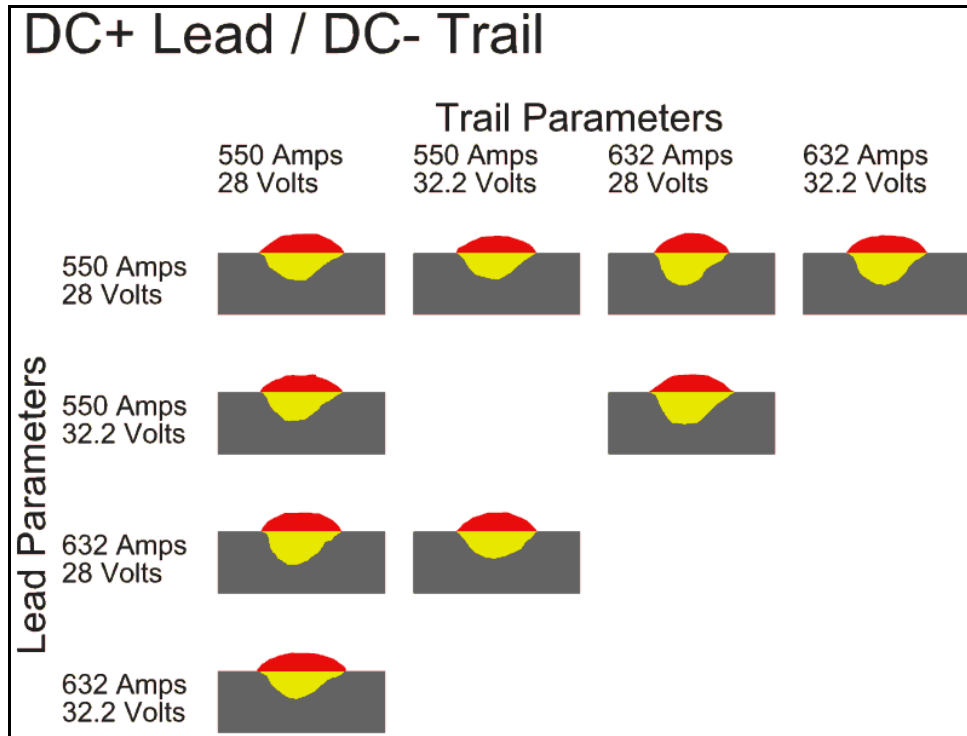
Group 2 DCEP Lead, DCEN Trail Tandem Weld Bead Cross-Sections
